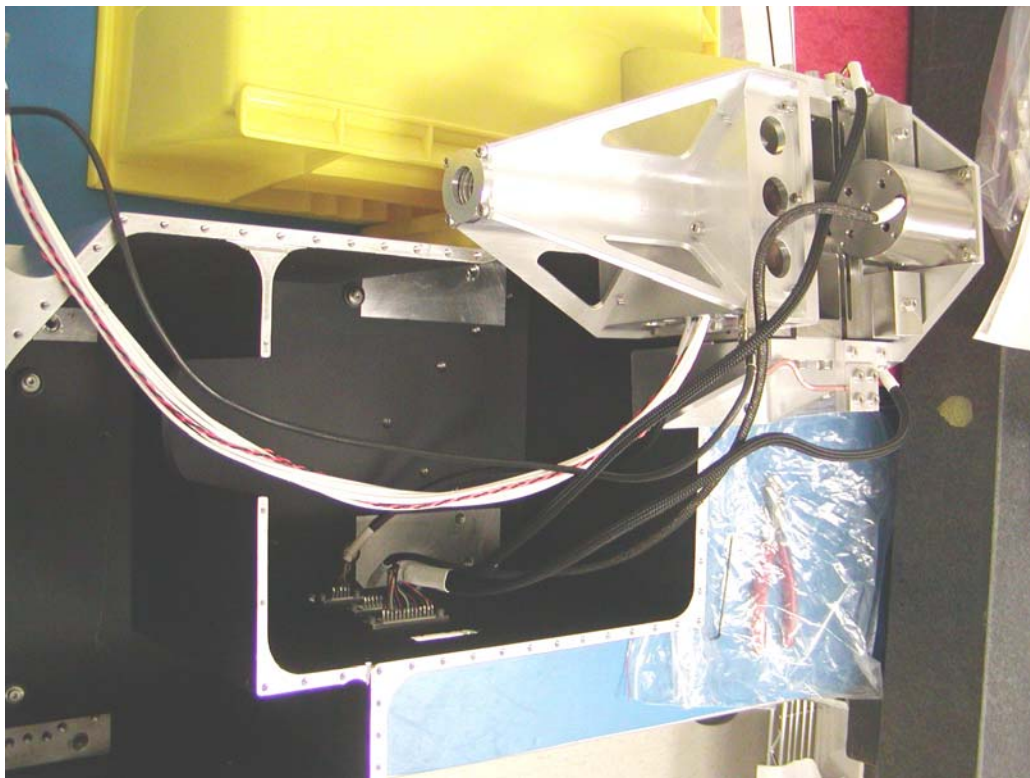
Detector Focus Assembly removed from the OIWFS bench prior to unbolting the remaining electrical connectors. The cables are of insufficient length to permit the focus assembly to sit on the table outside the bench.
